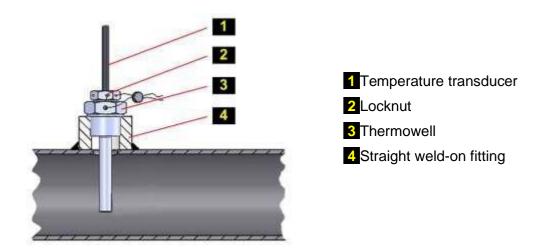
Mounting the temperature sensor using a straight weld-on fitting
